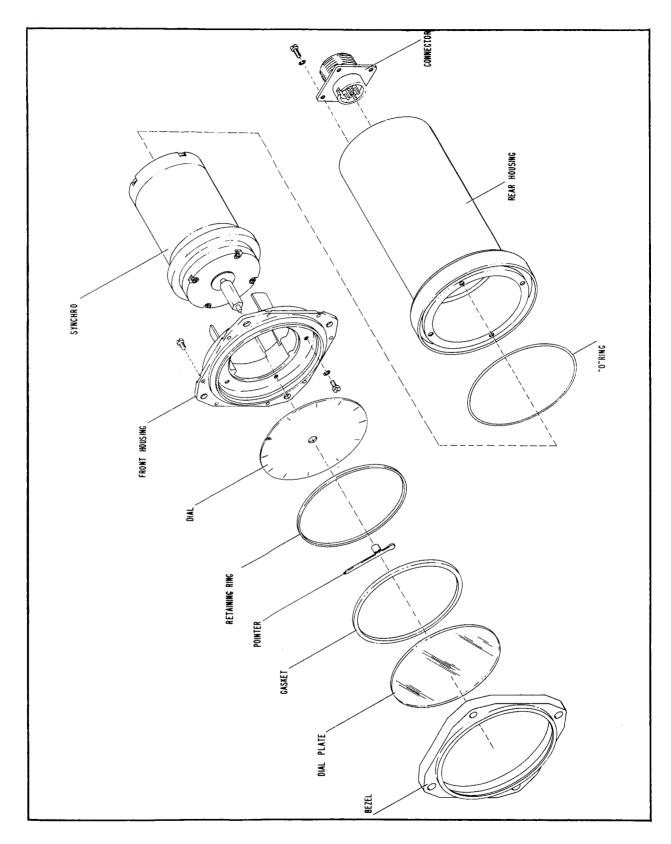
Acquisition Data Console Synchro Receiver, Exploded View
